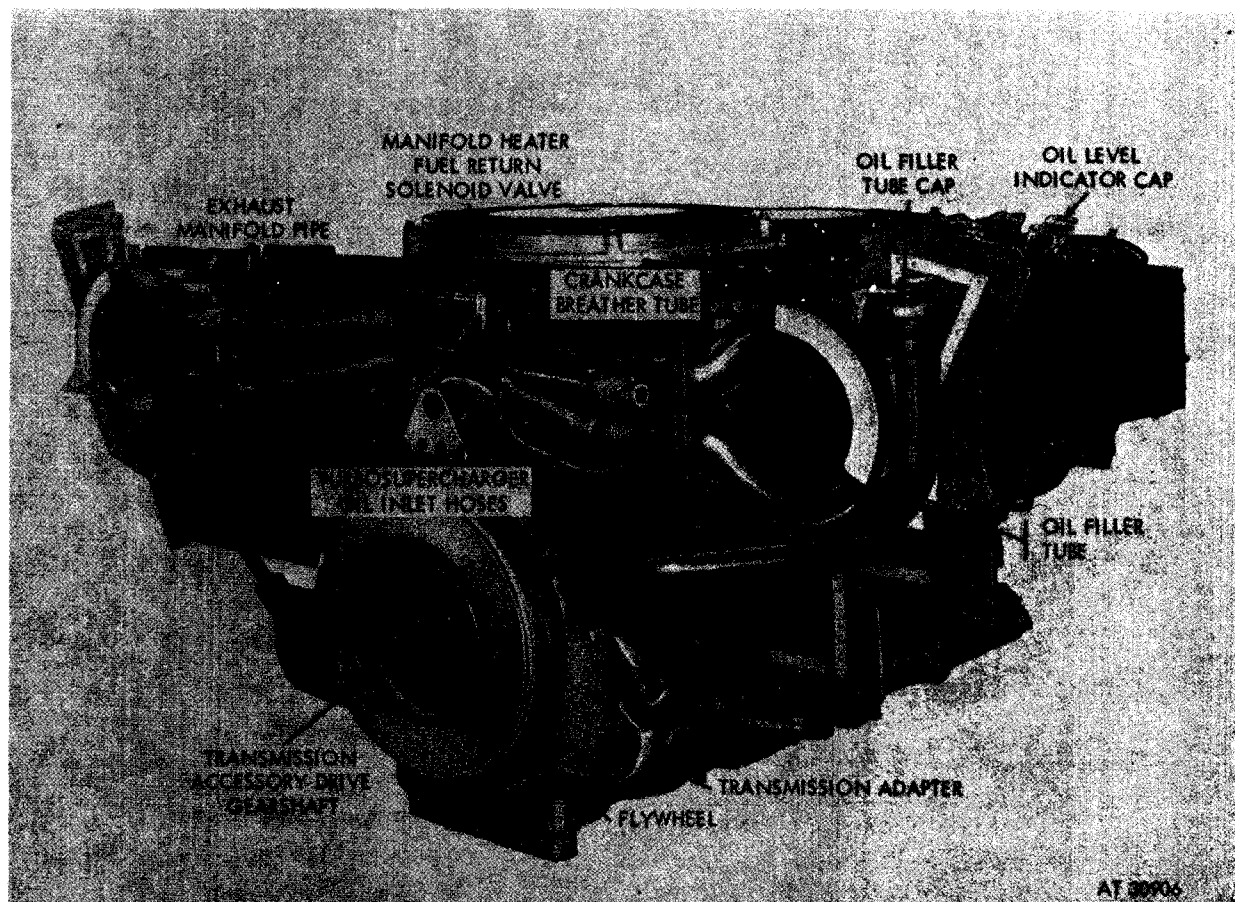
AVDS-1790-2A engine assembly with relocated oil filler tube-rear view.
